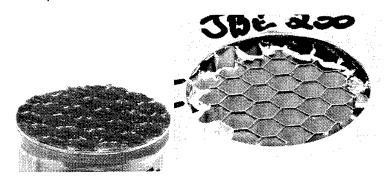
Failure surfaces resulting from tensile testing of the Untreated honeycomb and AF130-2 adhesive conditioned 150 days at 70° C/100% R.H., indicating fillet bond pull-out.
